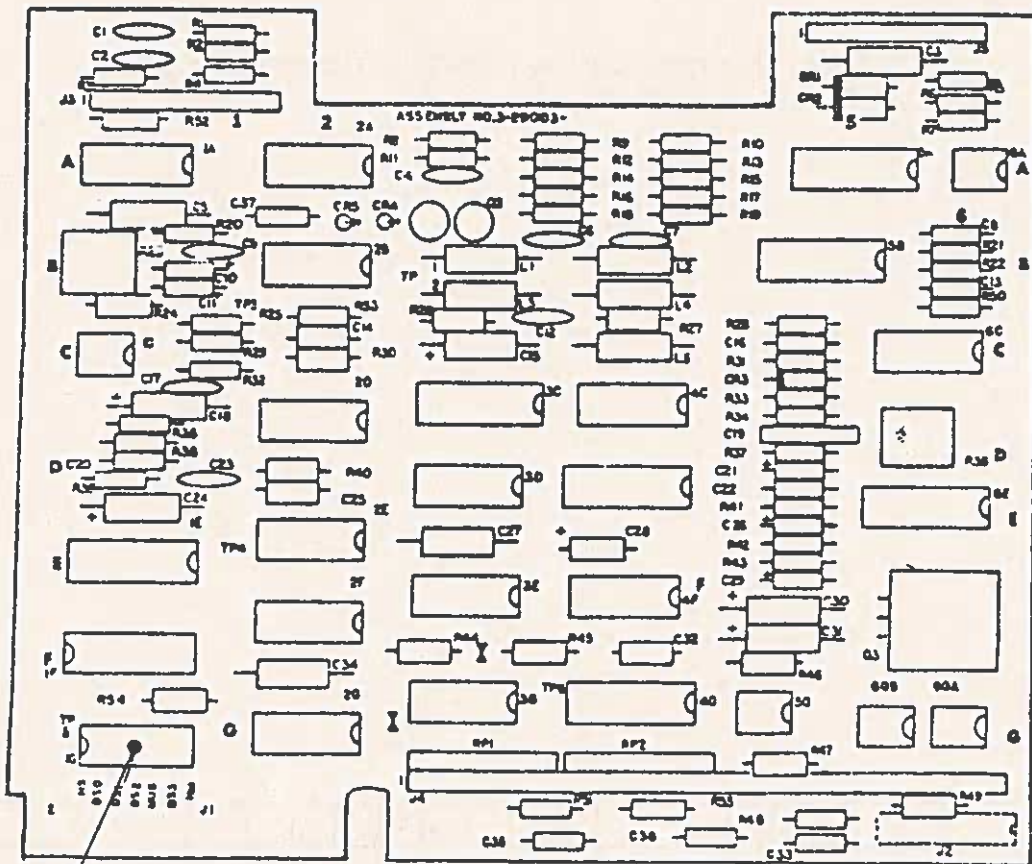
MPI 51/52 - PWB COMPONENT LAYOUT
